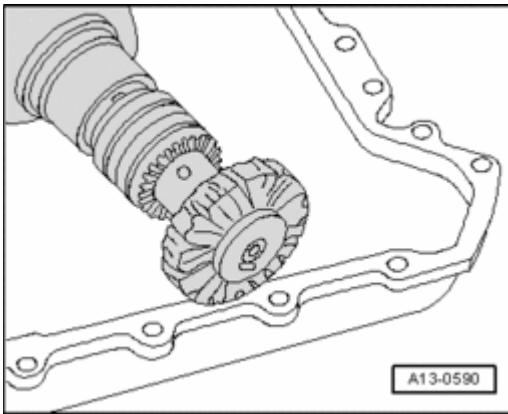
Using Rotating Plastic Brush To Remove Sealant Residue On Timing Chain Covers And On Cylinder Block And Cylinder Head
